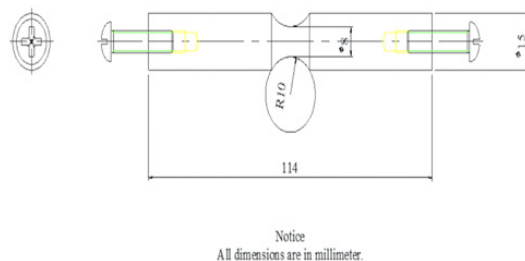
The load and support anvils of the INSTRON 4467 Tensile Testing machine are identical and contain a 'divot' in the center where we locate the specimen. The 'divot' is made for the specimen to fit precisely for the three-point bending test.
